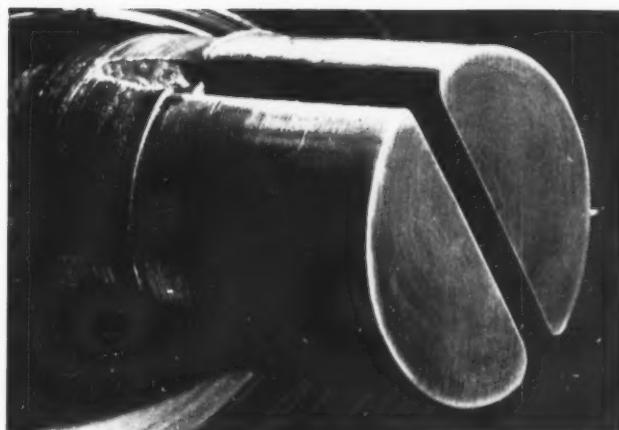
End view of drum of Fig. 79 etched to show decarburized surface of the cold-drawn stock
